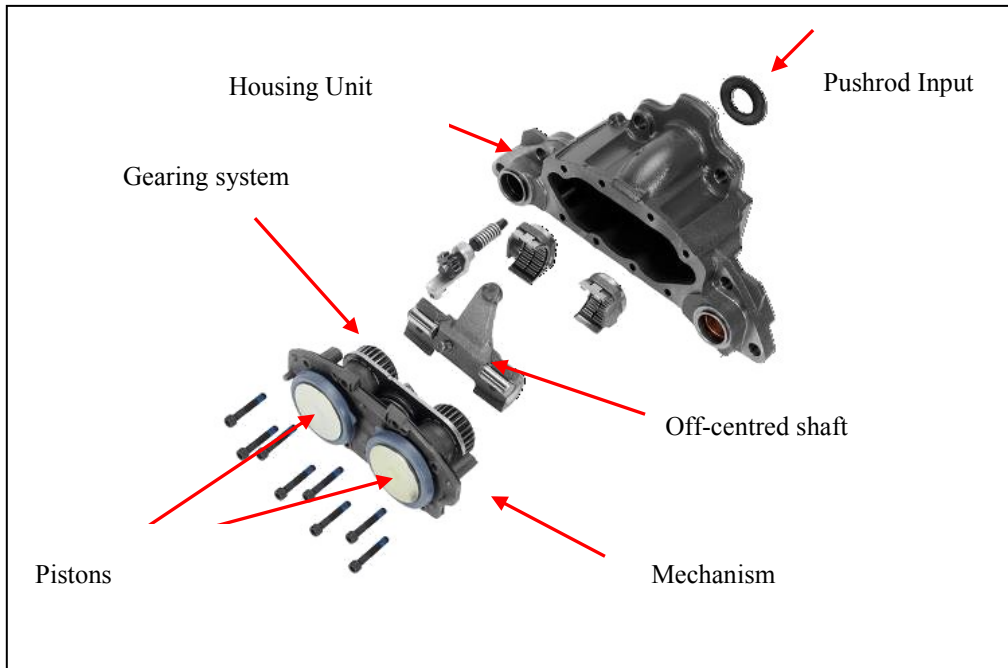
Exploded view of the parts making up the Mechanism component, located in the Housing Unit
